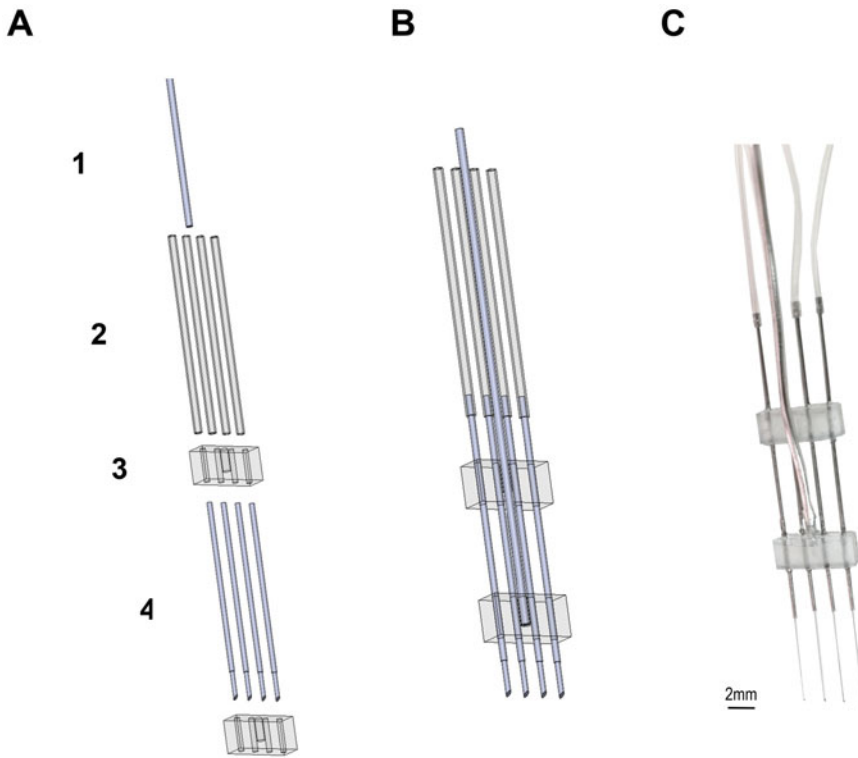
Linear 1 × 4 microinjector array. (a) Components of linear 1 × 4 array: (1) 23G wire, (2) silicone tubing, (3) 3D-printed manifold, (4) 33G needles. (b) CAD model of assembled array. (c) Photograph of assembled array
